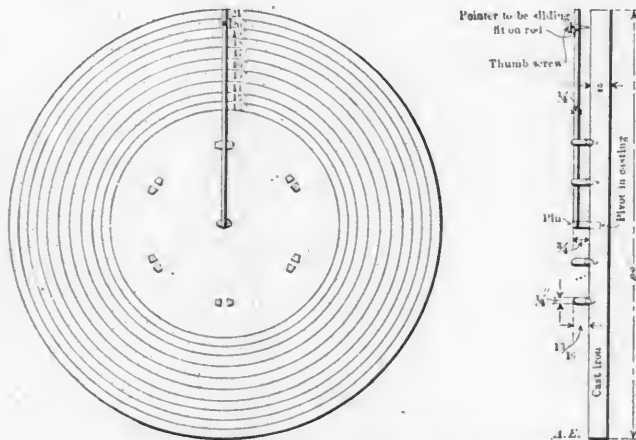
PLATE FOR LAYING OUT DUNBAR PACKING RINGS.
